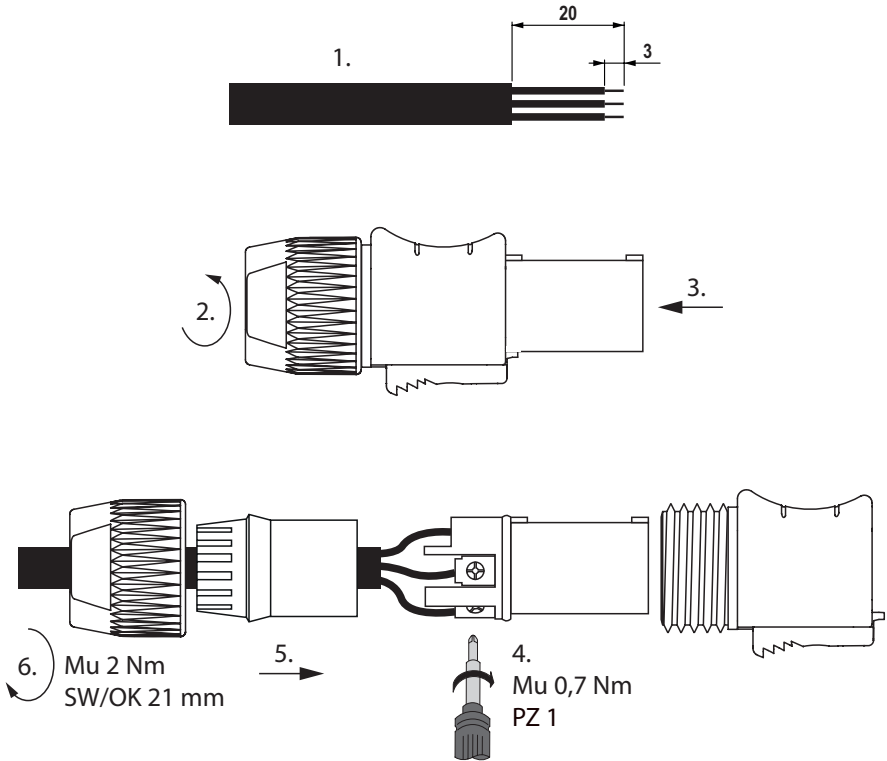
Power supply connector (Mu = torque, SW/OK = wrench size)
